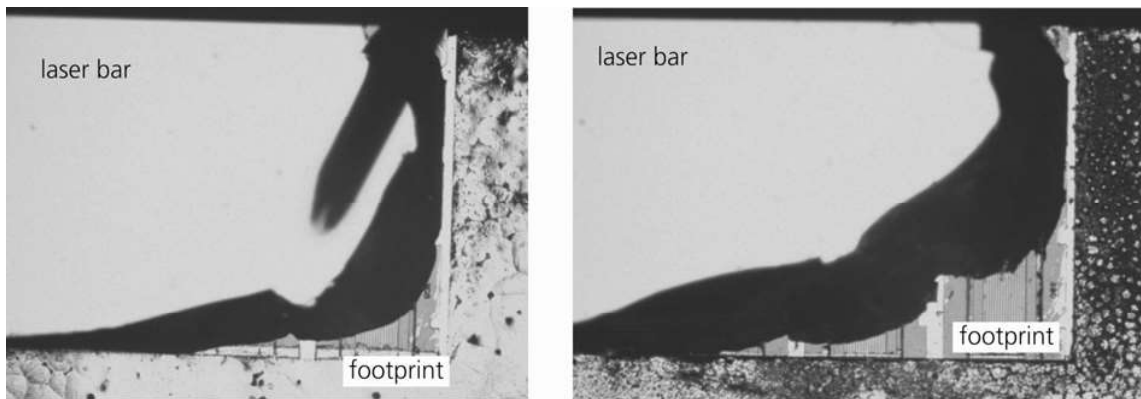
Top view of cracked bar (mounted with gold-tin solder on copper), which was spalled at the ends of the bar due to high stress. Left: following the packaging process, right: same bar several minutes later, the edge has cracked further.
